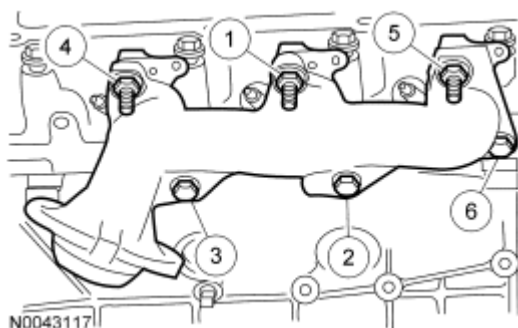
Identifying Tightening Sequence Of Exhaust Manifold Bolts
